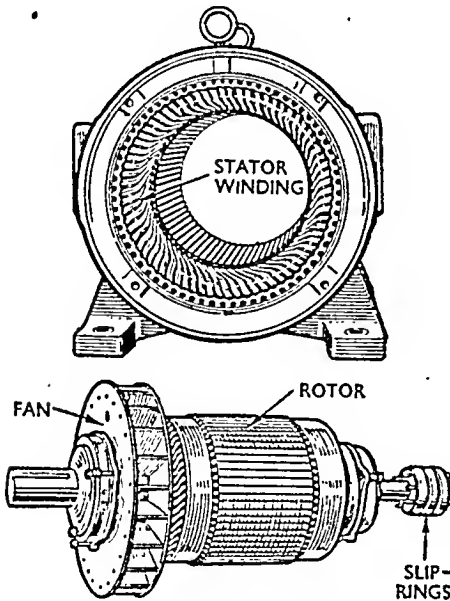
Stator and rotor of a three-phase slip-ring induction motor. Ball or roller bearings, which are not visible, are contained in housings on the shaft.
